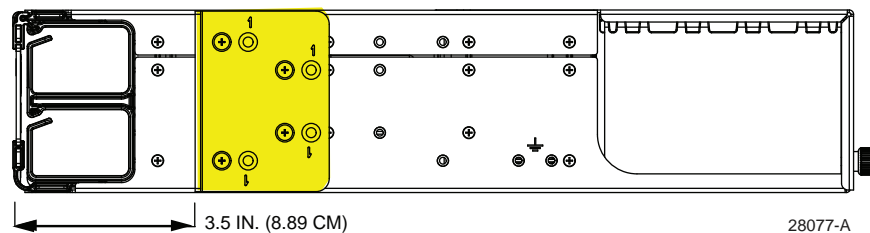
Rack Mounting Position for 3.5-Inch Recess
